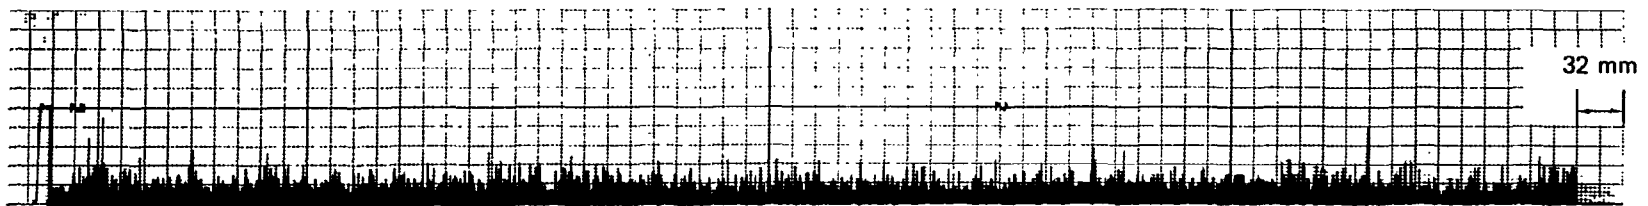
Results of ultrasonic inspection of modified 9 Cr-1 Mo steel tube 3628 as fabricated.
